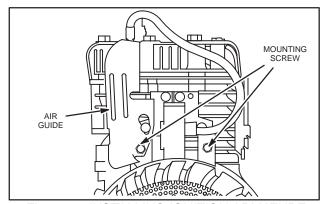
INSTALLING IGNITION ARMATURE AND AIR GUIDE
